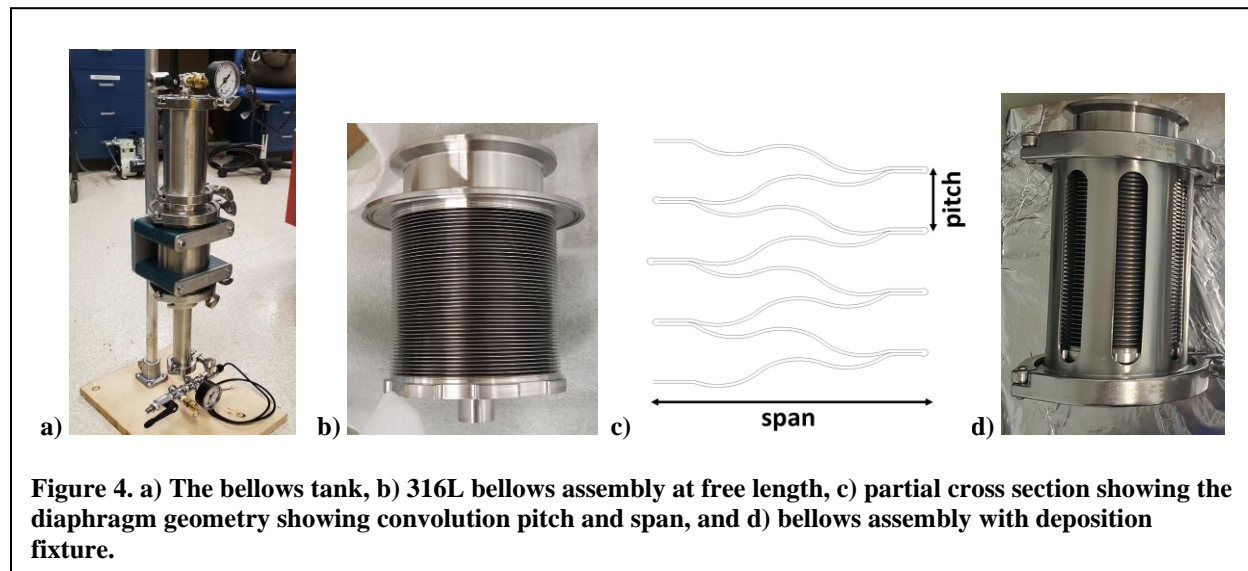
a) The bellows tank, b) 316L bellows assembly at free length, c) partial cross section showing the diaphragm geometry showing convolution pitch and span, and d) bellows assembly with deposition fixture.
